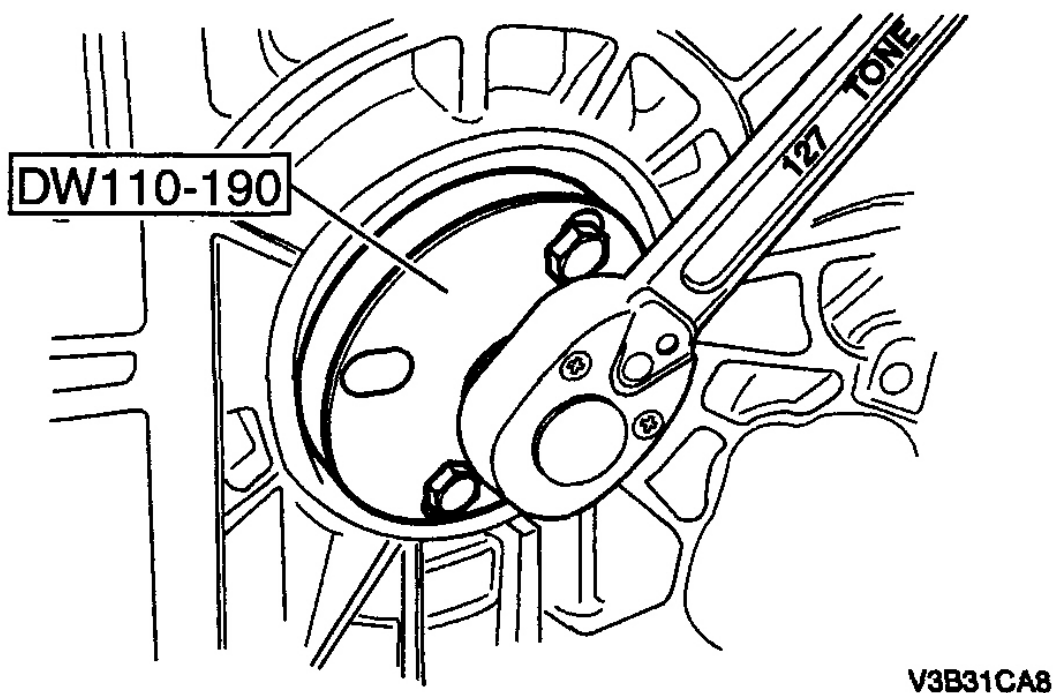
Adjusting Crankshaft Using Crankshaft Adjuster DW110-190
